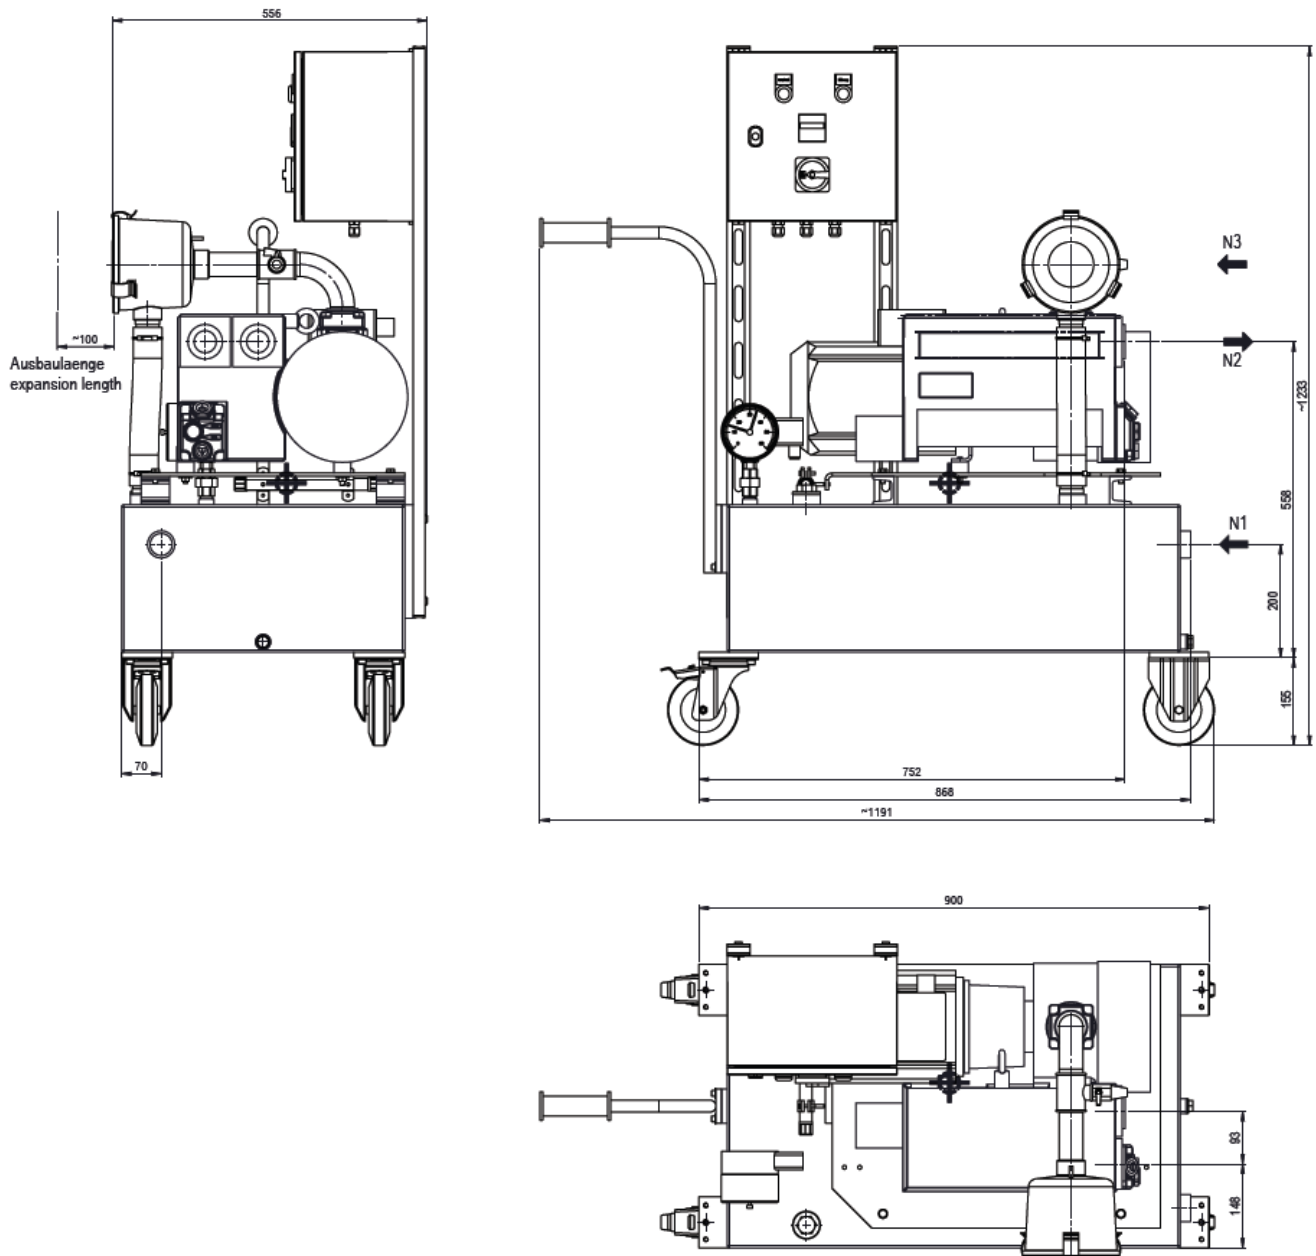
Dimensions vacuum system VD 0063 G AAA TCAX (mobile)
